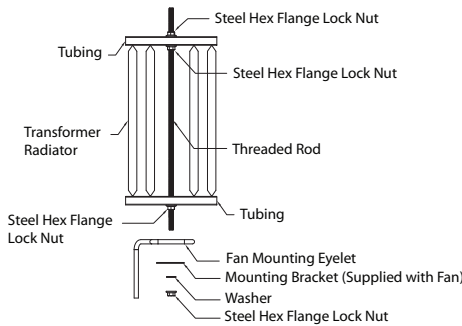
Accessory Guard-Mounting Kit Installation (Top View)
